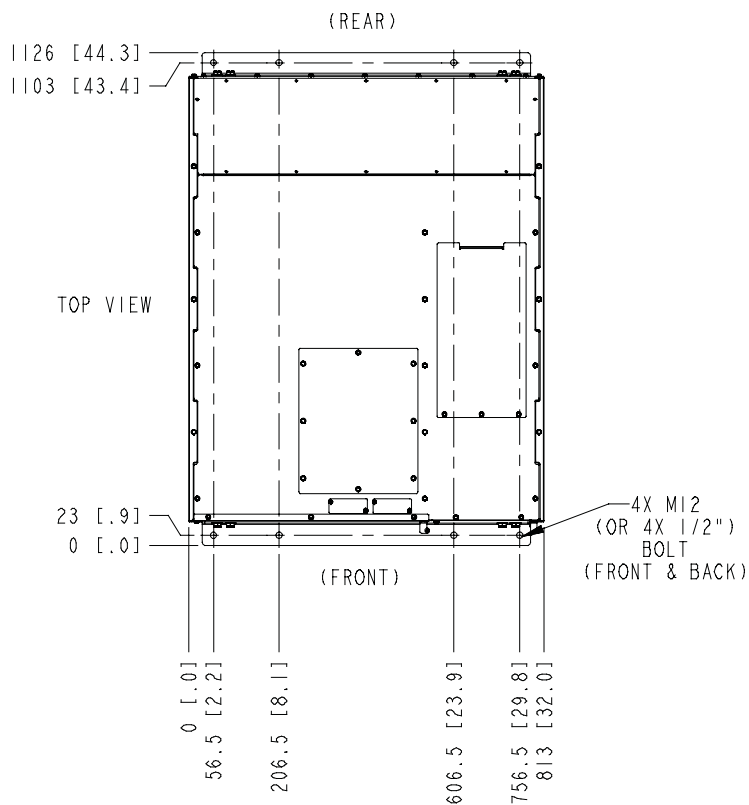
Seismic Mounting Bracket Mounting Hole Locations
